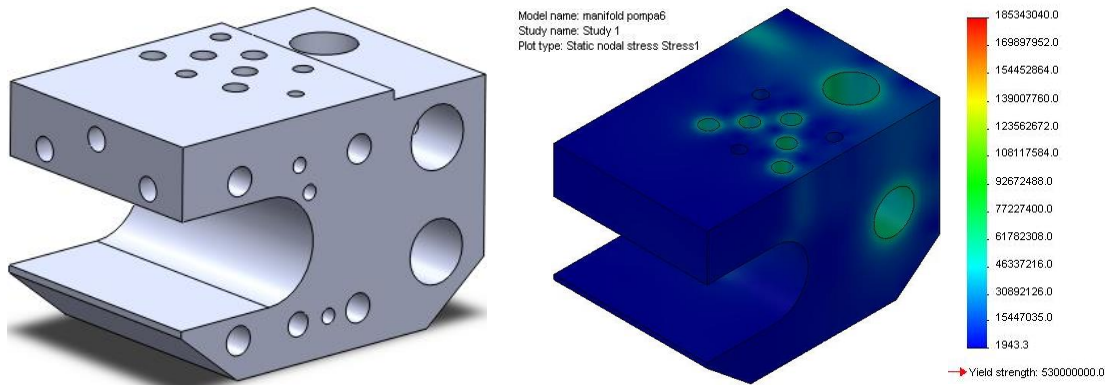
Finite element analysis of Manifold Bouyancy Engine
